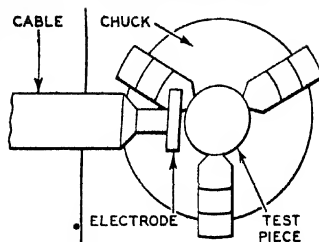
CHECKING LATHE BEARINGS WITH A PROXIMITY METER
